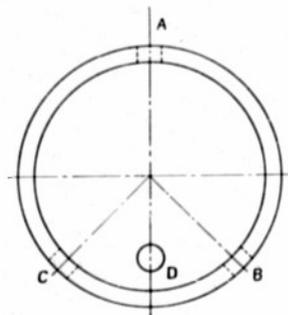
Location of spark-plug holes in C. F. R. engine.
